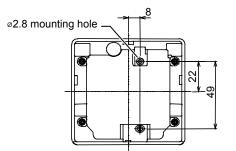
Dimensions (mm): Mounting plate of Thermoplate mounting kit
